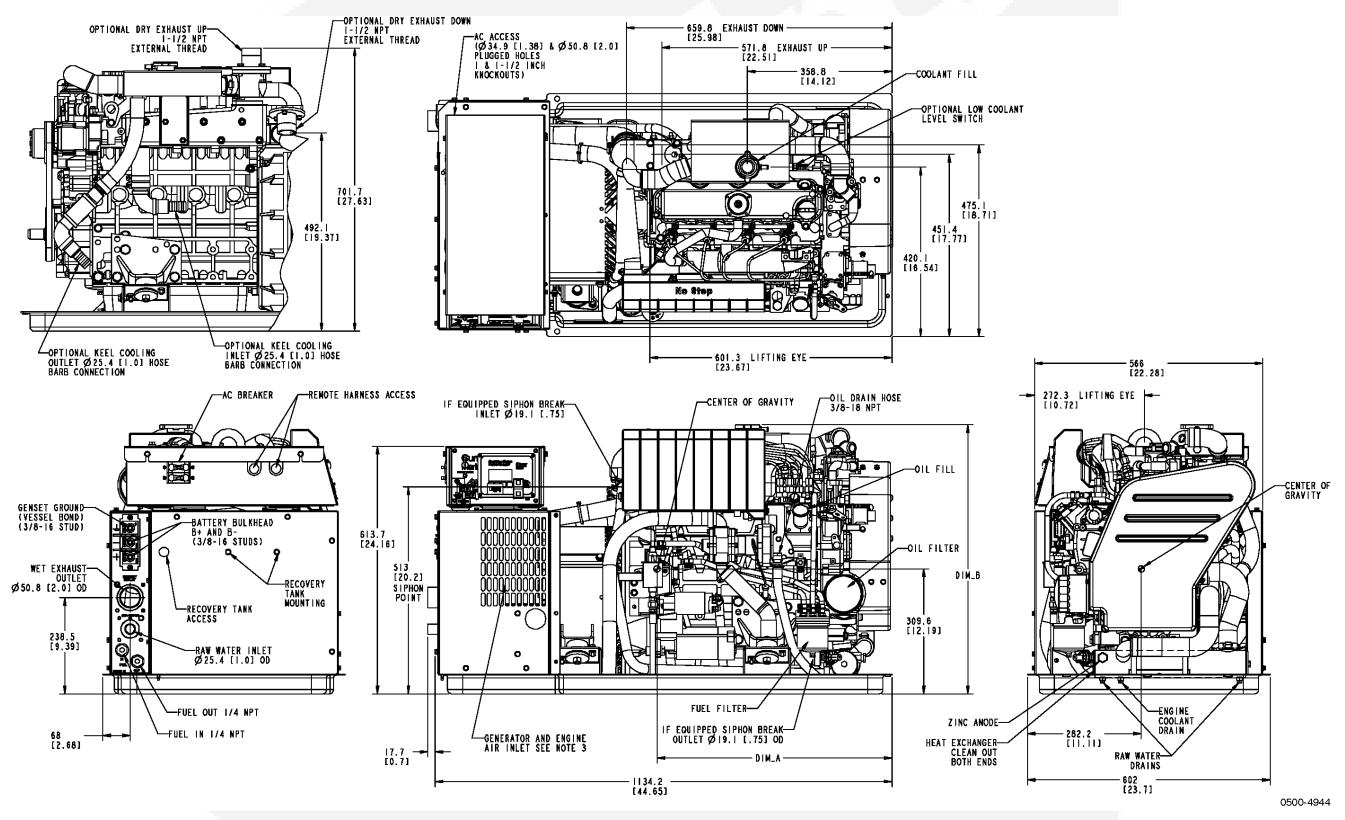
MDKBP, MDKBR, AND MDKBV OUTLINE DRAWING (SHEET 2)
